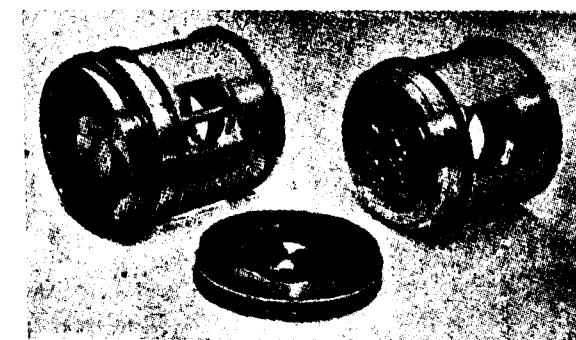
Assembled and dismantled pistons of the two part, oil cooled type.
